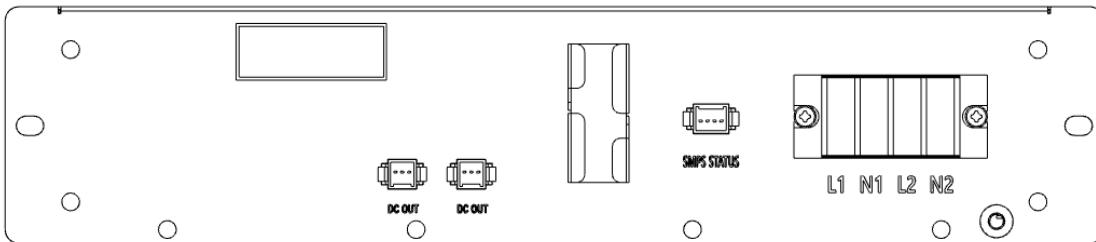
Front View of SMPS Assembly Type B, 1-Phase Input
